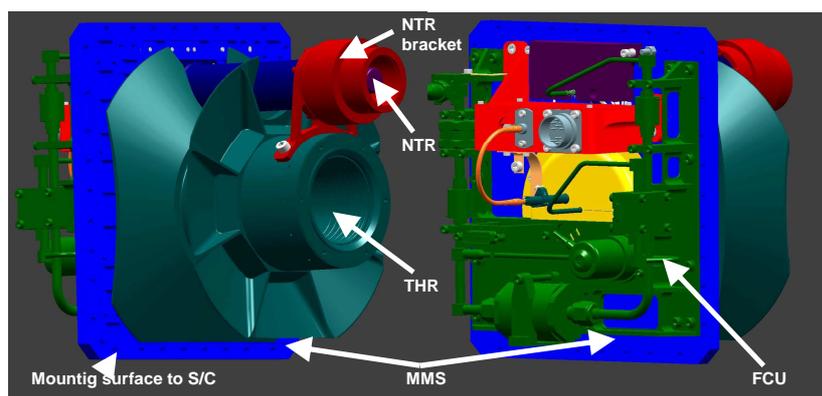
3D-drawing of the HEMPT Module. Left: front side; right: rear side.
